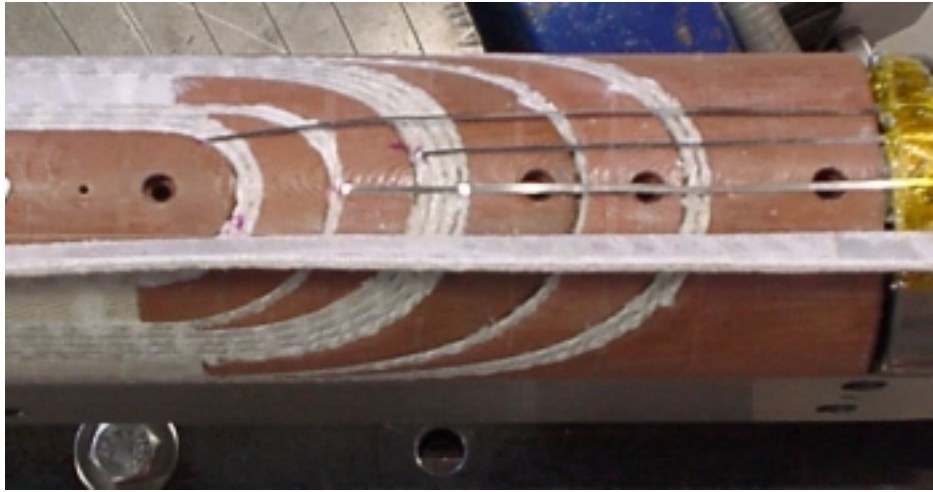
Cured Inner Coil, PC03 wound using Selective Laser Sintered End Parts.
